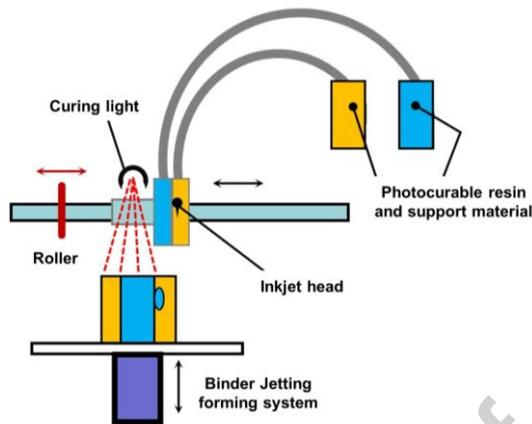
Simplified binder jetting molding 3D the main components of the printer; each layer printed is planed and cured immediately after UV exposure [30].
